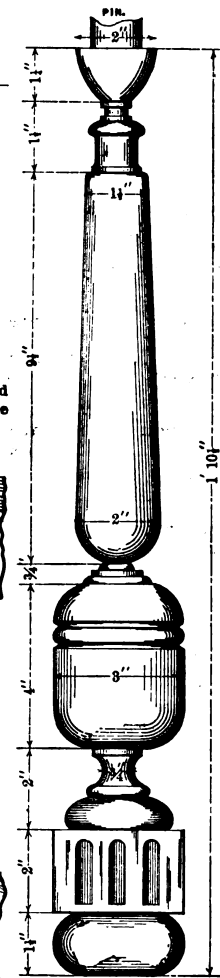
Detail of Legs.—Scale, 8 Inches to the Foot.
